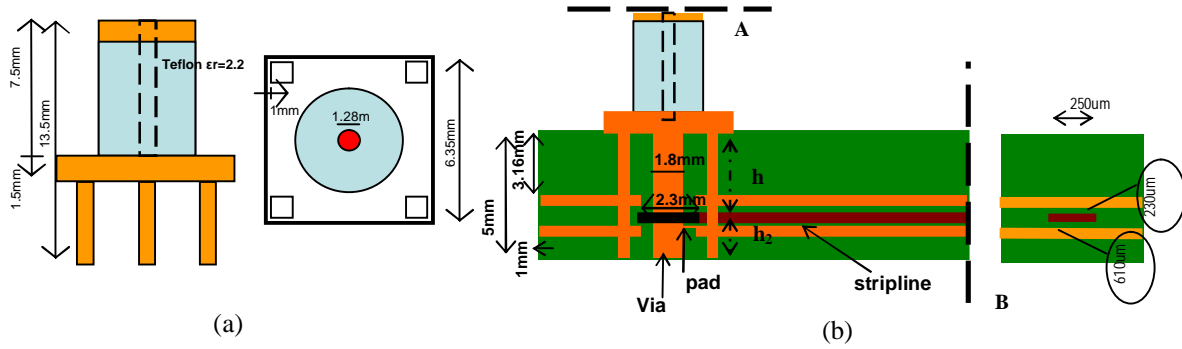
(a) Top and lateral view of the SMA connector with dimensions, (b) cross section of the board
